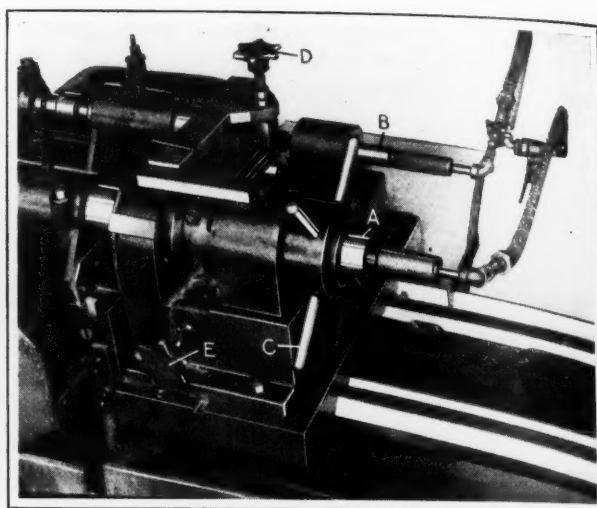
Fixture in which the Connecting-rod is Held for Diamond-boring
